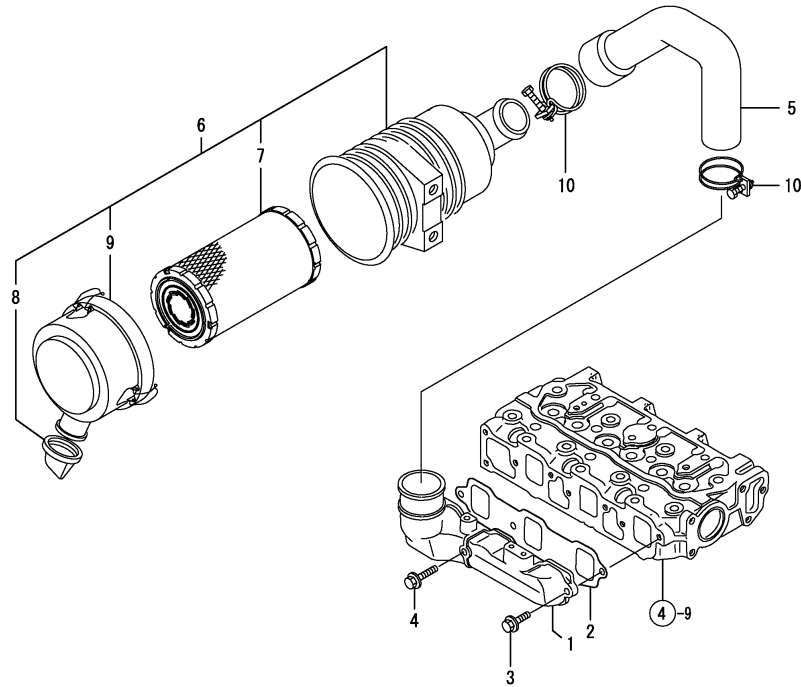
SUCTION MANIFOLD & AIR CLEANER
